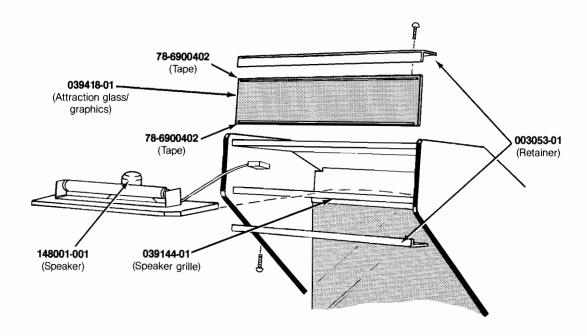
Fluorescent Tube and Speaker Board Removal Upright Cabinet
